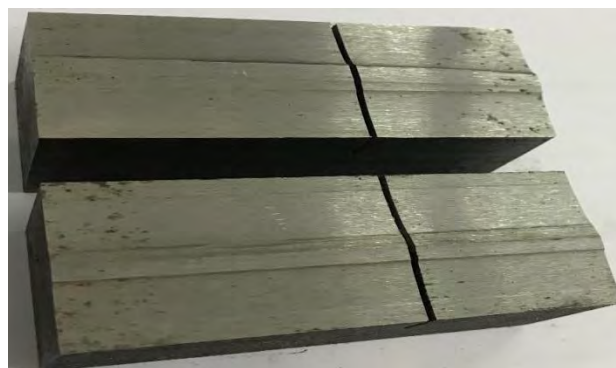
Photographic view of workpiece specimen (AISI 1060 Hardened steel)
